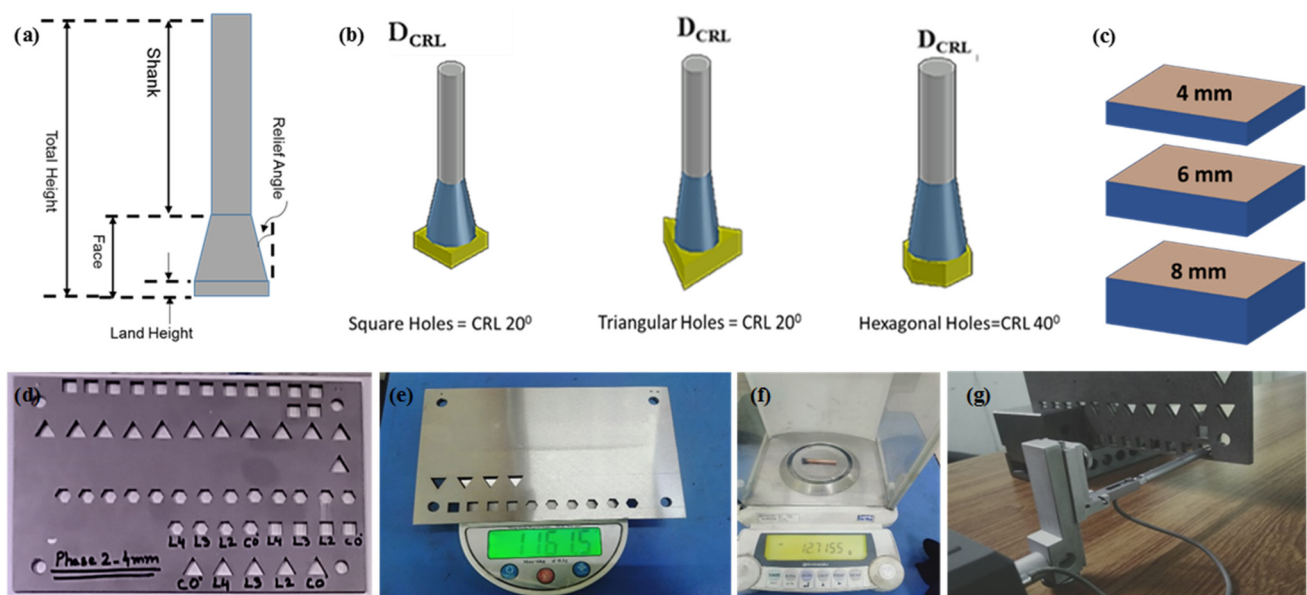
Experimental graphical flow illustrations; (a,b) non-conventional electrode designs, (c) various workpiece thickness schematic, (d) machined workpiece after EDM, (e) weight balancer for MRR, (f) weight balancer for TWR, and (g) surface roughness meter.
